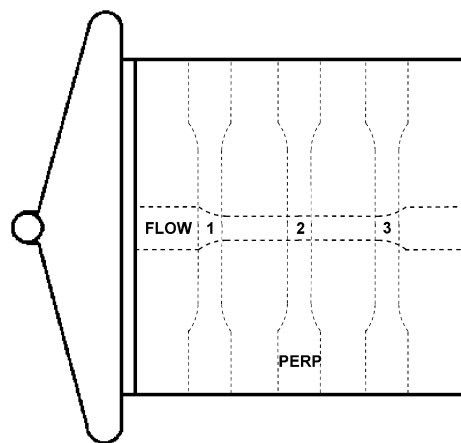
Schematic drawing of mold used for injection, including a V-shaped runner. Cutting positions for FLOW and PERP type of specimens are indicated.
